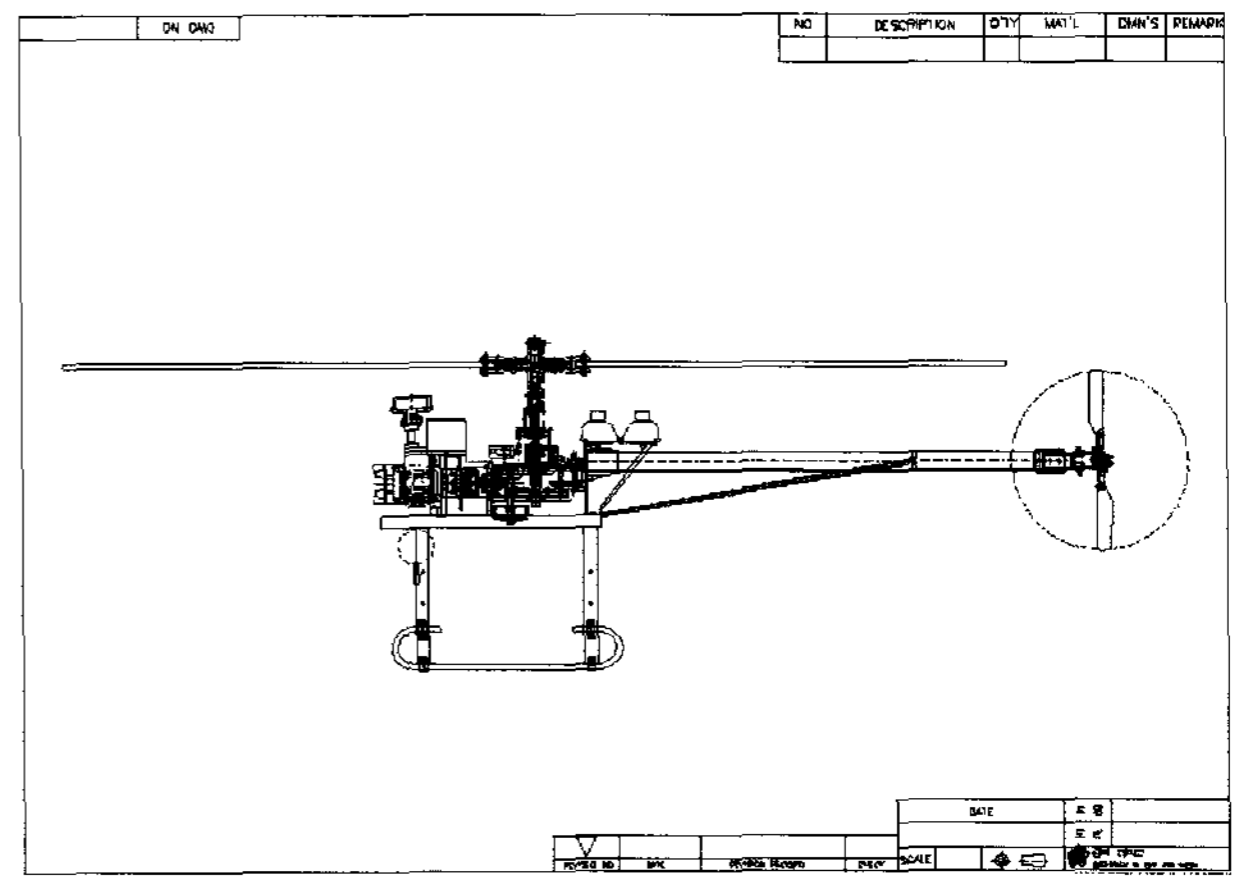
Assembly drawing of the prototype agricultural helicopter.
